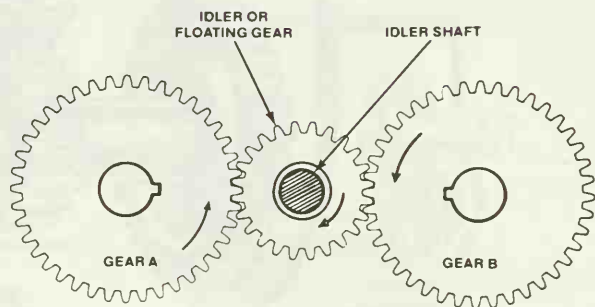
A floating or idling gear allows gears to turn in the same direction. (Chrysler Corporation)
